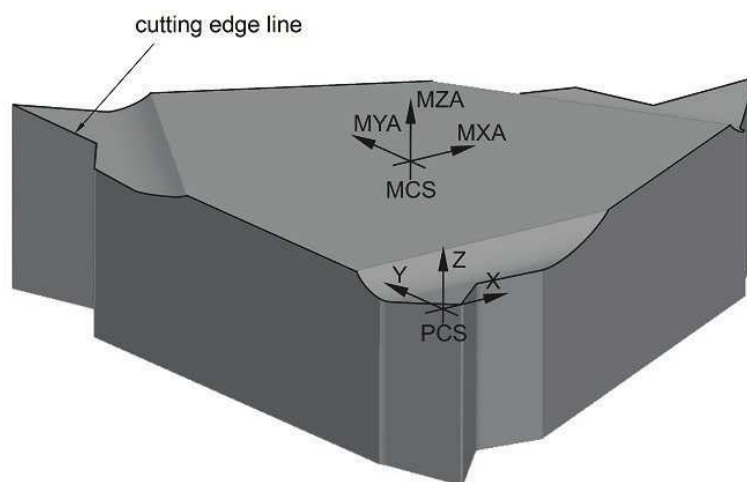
Example 2 — Threading insert with three cutting edges, one tooth — Data exchange model
